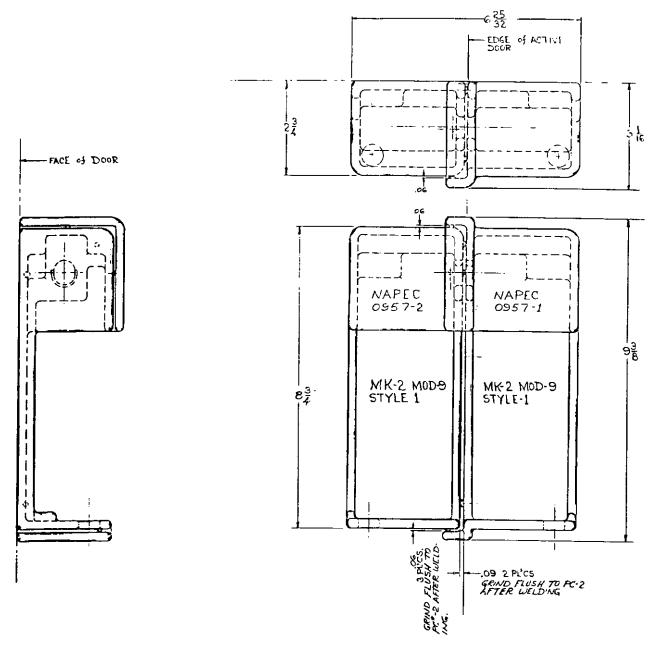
Style I, MK 2 MOD 9 from Drawing 5532334, Sheet 1 of 3
